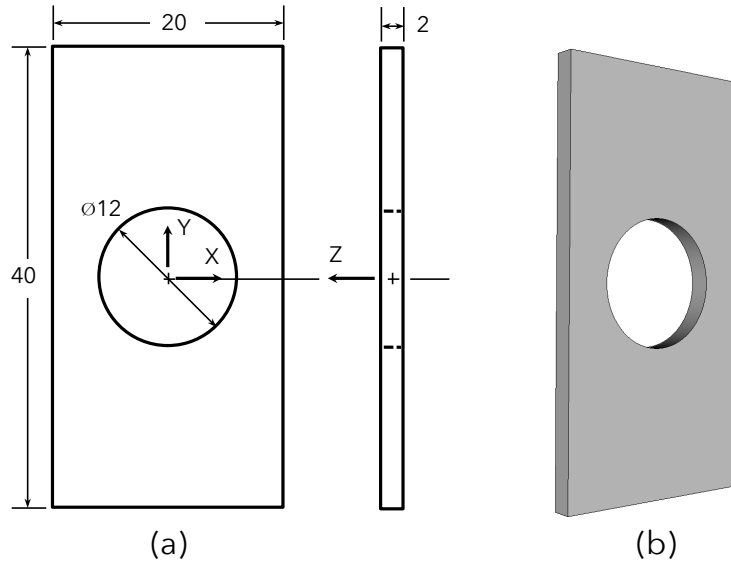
(a) Geometry definition and (b) three-dimensional view for the problem of a plate with hole.
